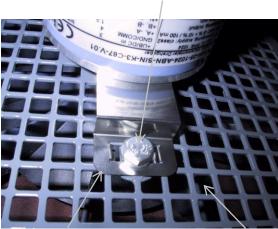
Looking at the Flange casing and Brake, the Motor has been removed
